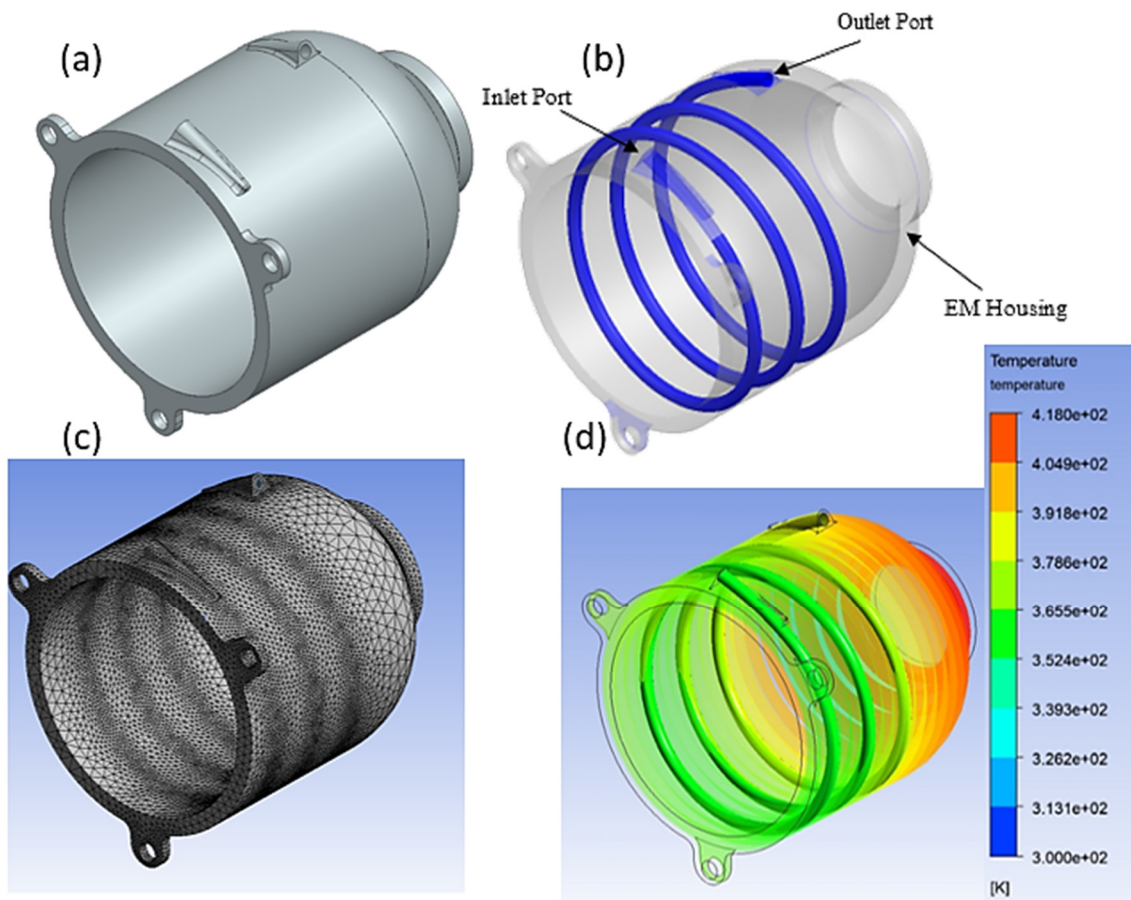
(a) CAD Geometry–EM housing. (b) CAD Geometry of helical water-cooling jacket. (c) Helical water jacket geometry meshing. (d) Motor housing temperature distribution with helical water jacket.
